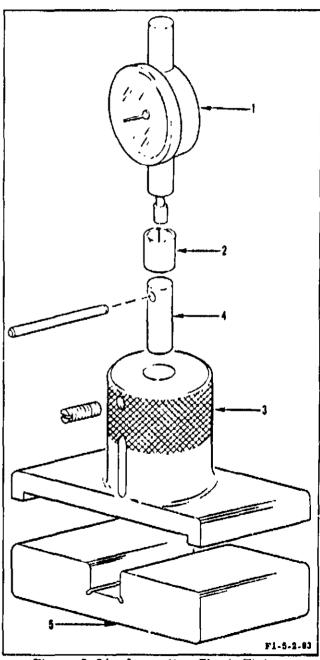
Inspection Check Fixture T-5037832 (Sheet 1 of 2)
